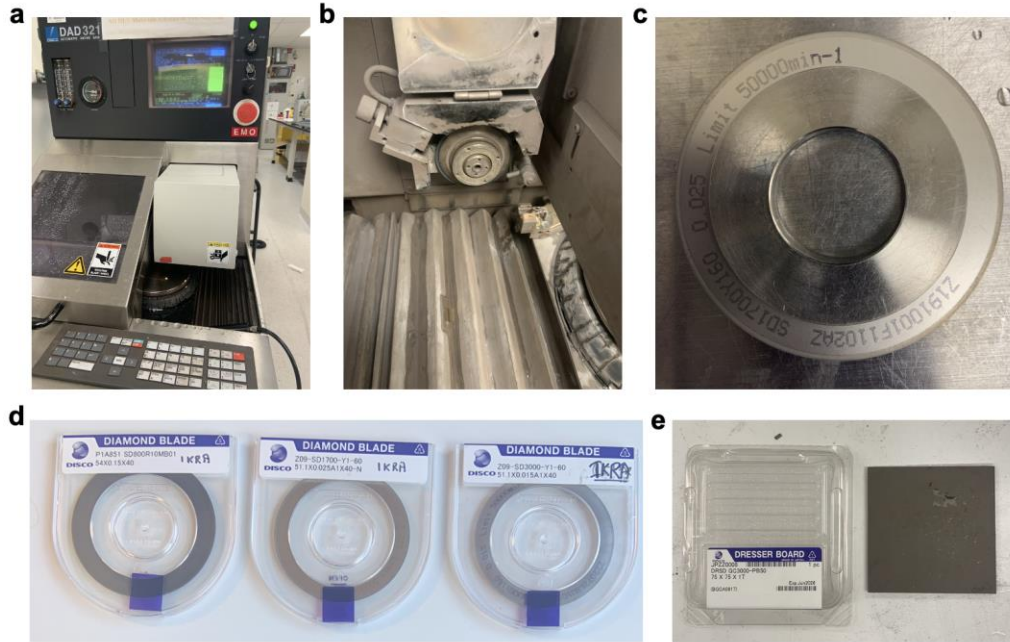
Micromachining the PZT-5H: (a) DAD321 dicing saw, (b) dicing spindle supporting the (c) flange and dicing blade, (d) different kinds of diamond blade (thickness: 150 μm , 25 μm , and 15 μm), and (e) blade dresser.
